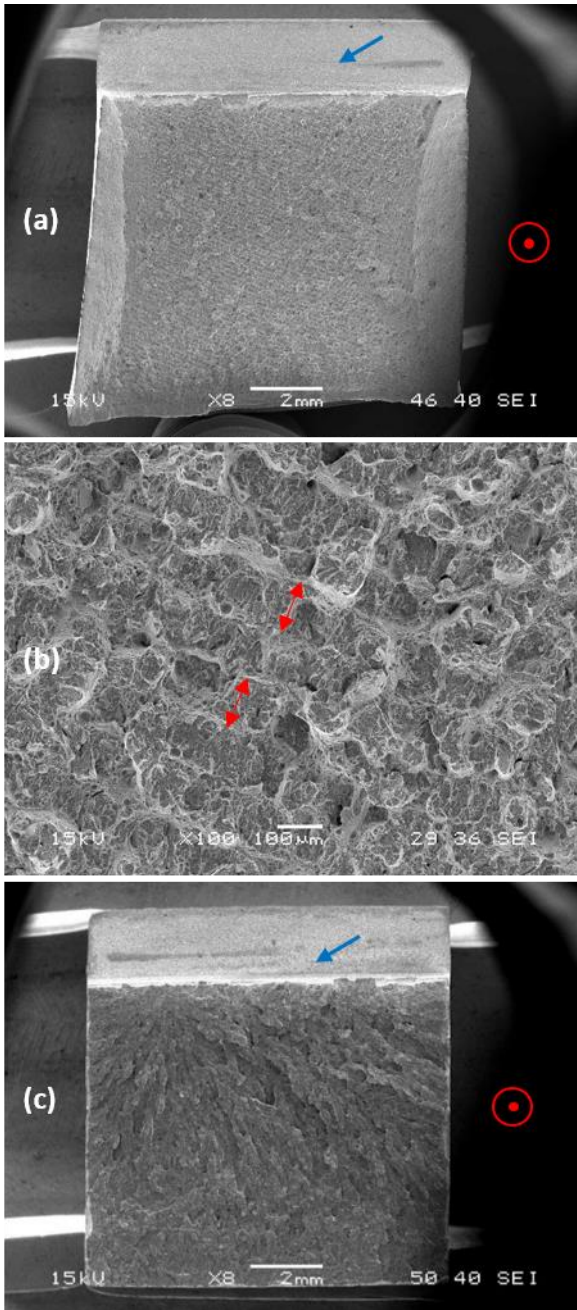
Fracture surface of As-built V-notch impact test samples (a) at low magnification and (b) at higher magnification, (c) fracture surface of ST V-notch impact test samples. Blue arrows indicate the position of the notch. Red circles indicate the fabrication direction. Red arrows on (b) highlight the presence of parallel strips of 100 μm width.
